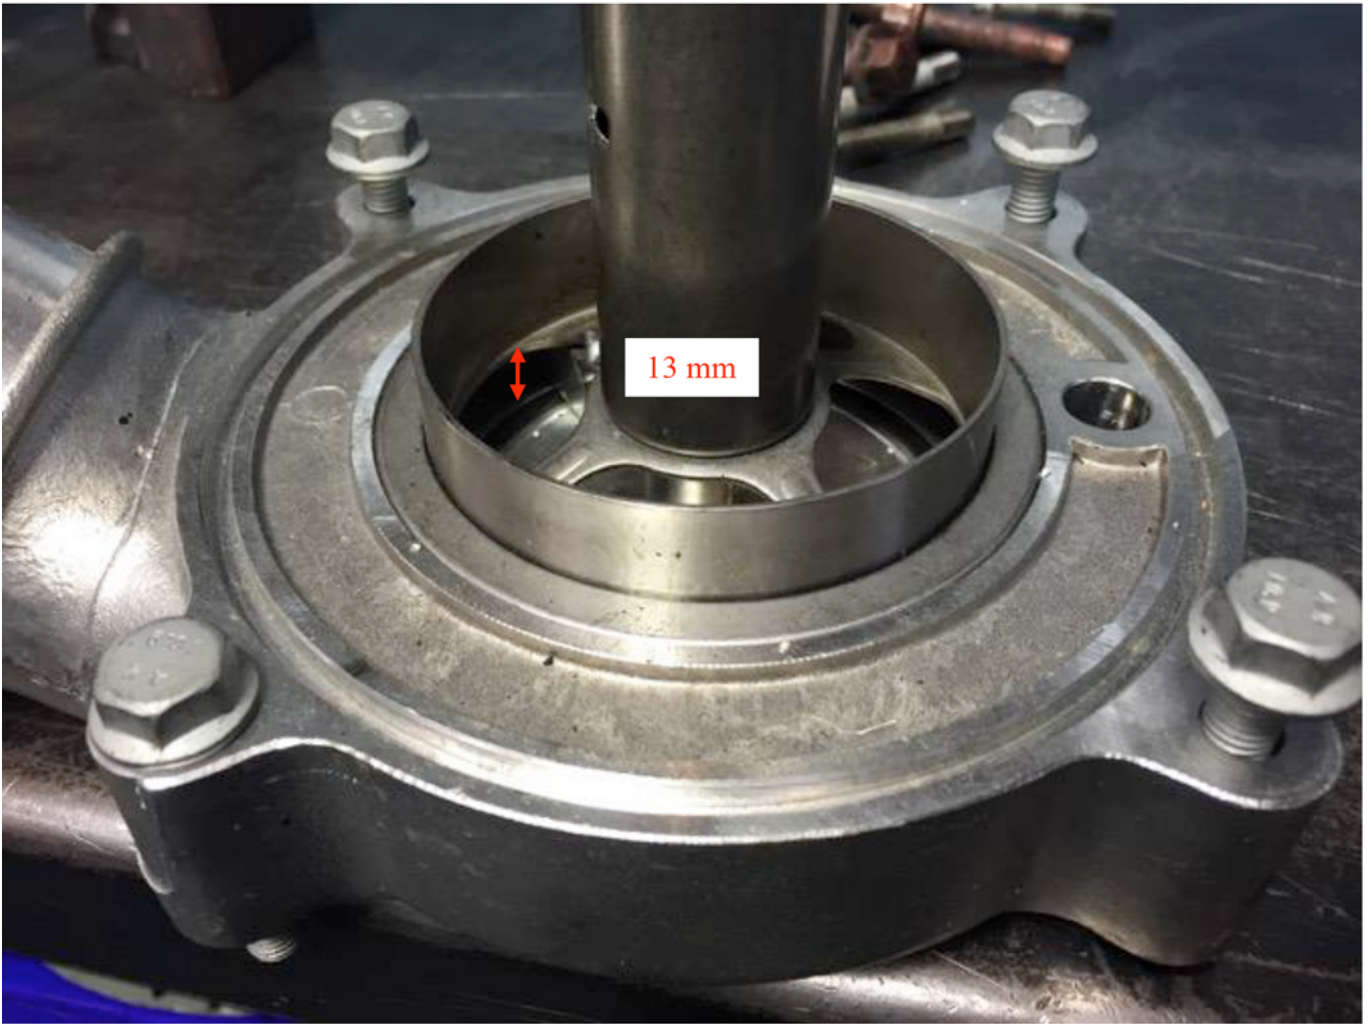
13 mm Blocked Open, Coolant Thermostat
